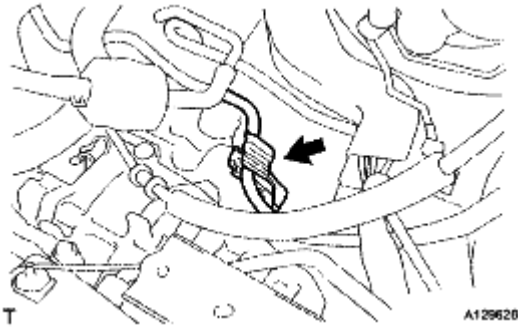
Identifying No. 1 Fuel Pipe Clamp
